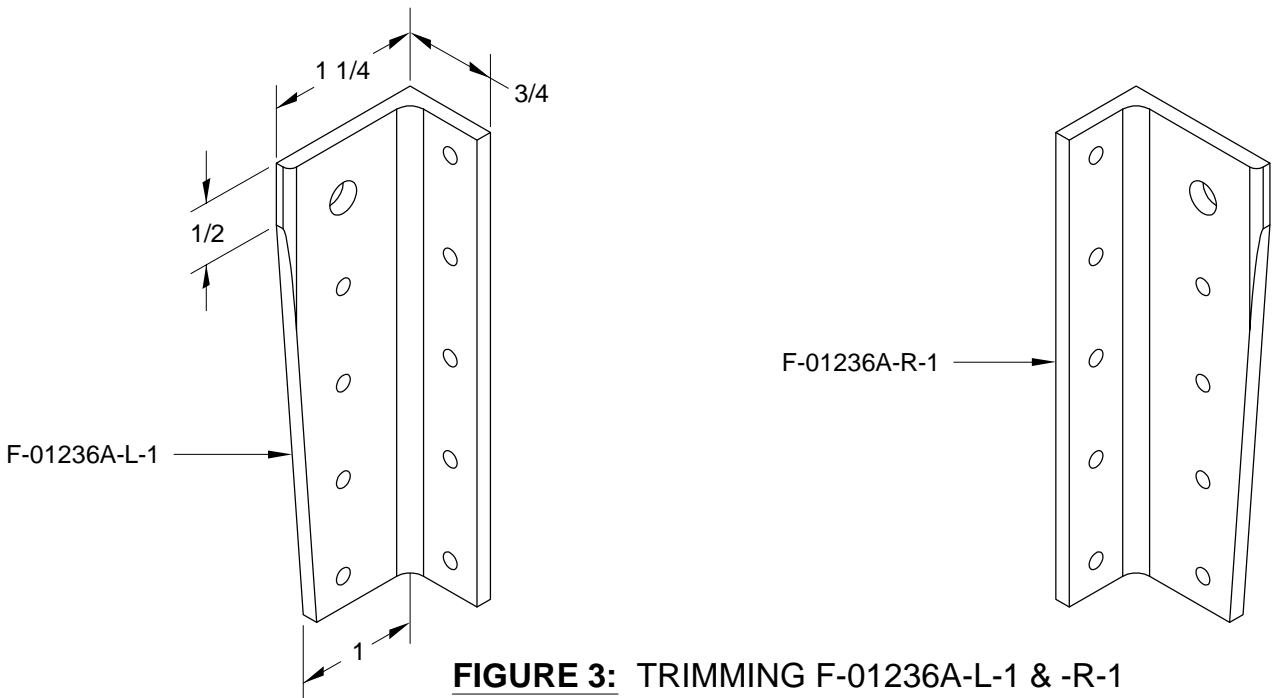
TRIMMING F-01236A-L-1 & -R-1
